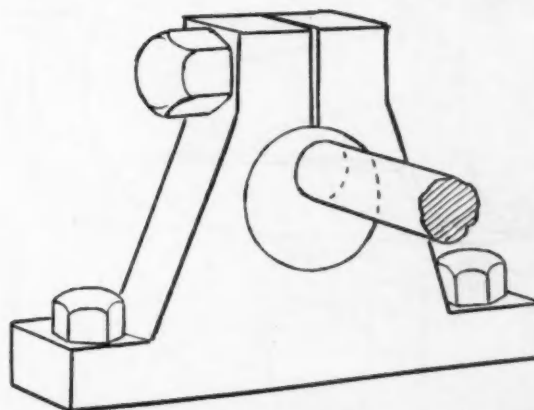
AN ECCENTRIC TYPE OF FAN-BELT ADJUSTMENT USUALLY REQUIRING A LARGE WRENCH OR A SPECIAL SPANNER TO TURN IT
